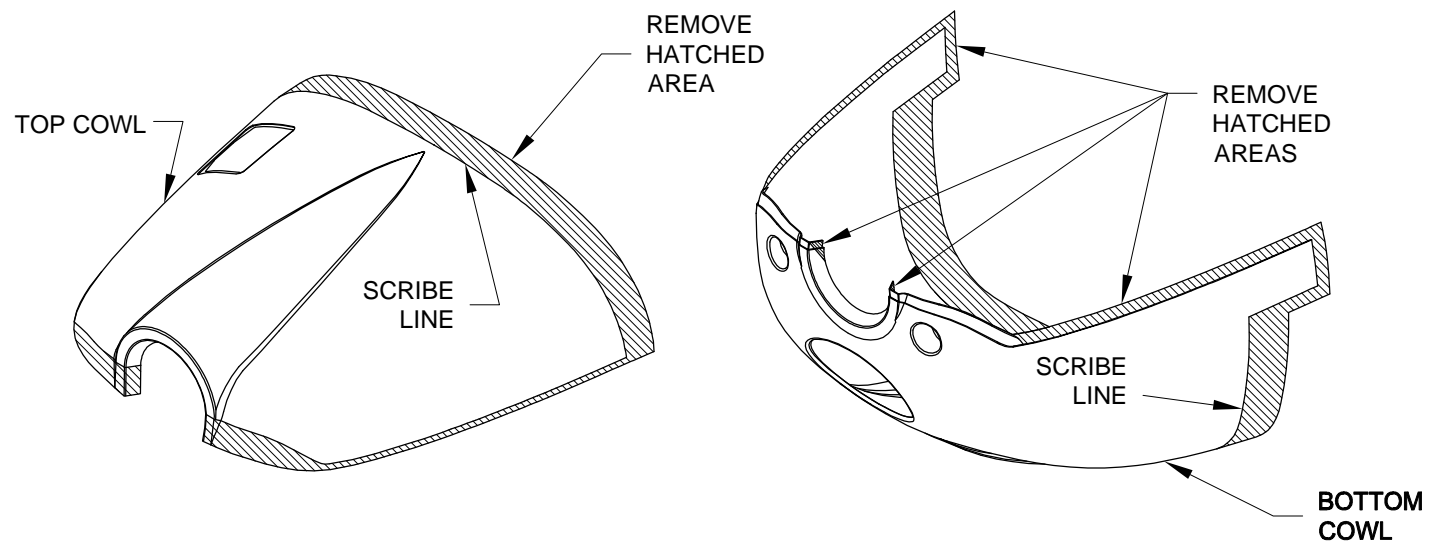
TRIMMING THE TOP AND BOTTOM COWL
